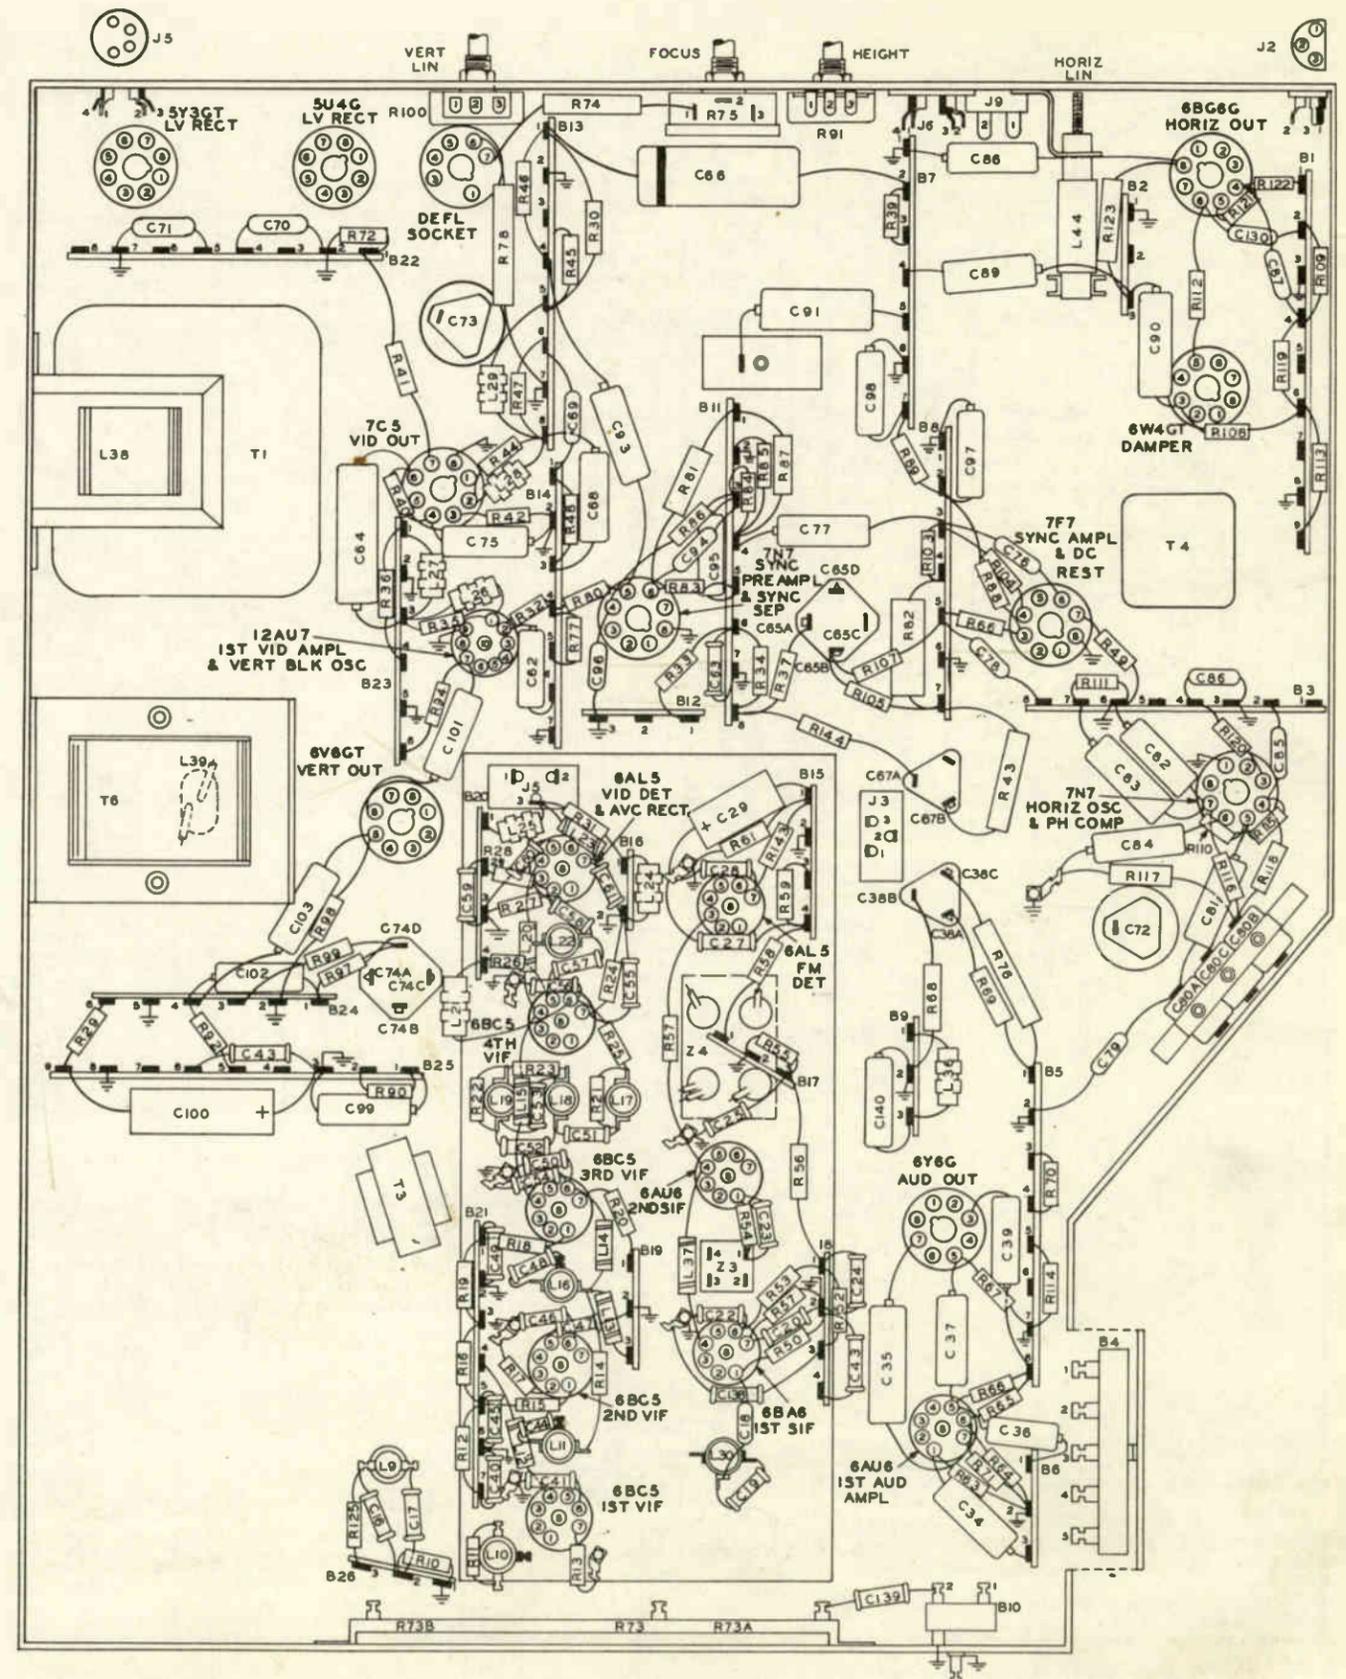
Bottom View of Chassis (TV), Models 50-T1477 to 50-T1482
